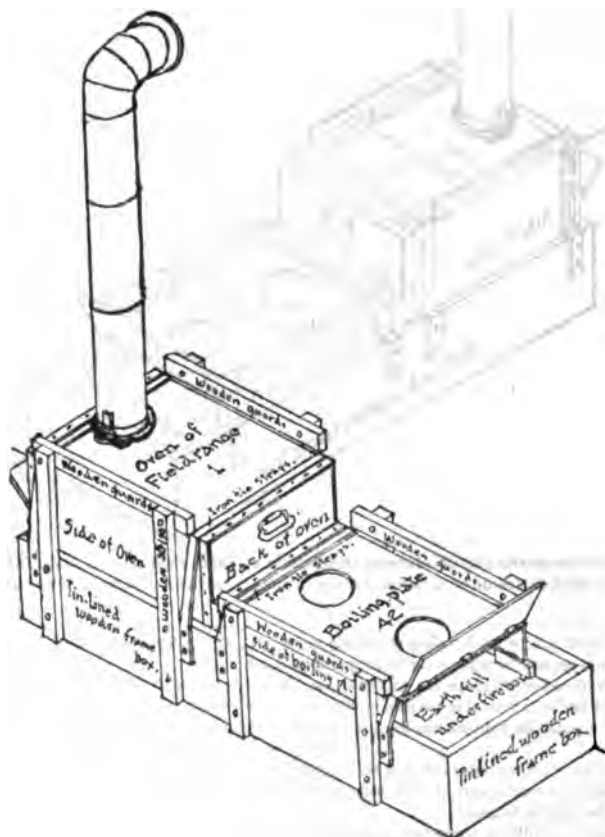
Isometric sketch, showing installation of Army field range 1, with boiling plate 42, back to back, in frame box, on car, for use in transit, without Alamo attachments.
